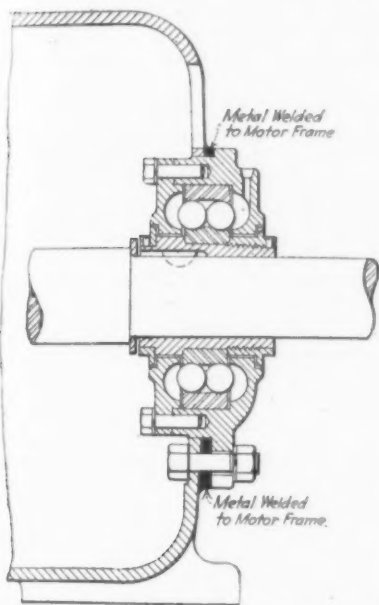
Ball Bearing Mounting on Mill Type Motor, Inclosed in Cartridge
